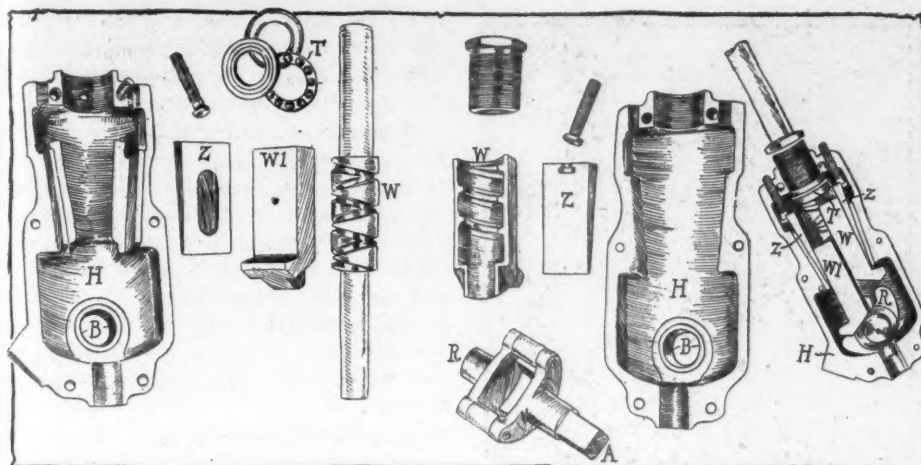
ASSEMBLY DITWILER STEERING GEAR
